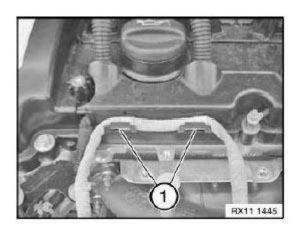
Cylinder Head Oxygen Sensors Courtesy of BMW OF NORTH AMERICA, INC.
